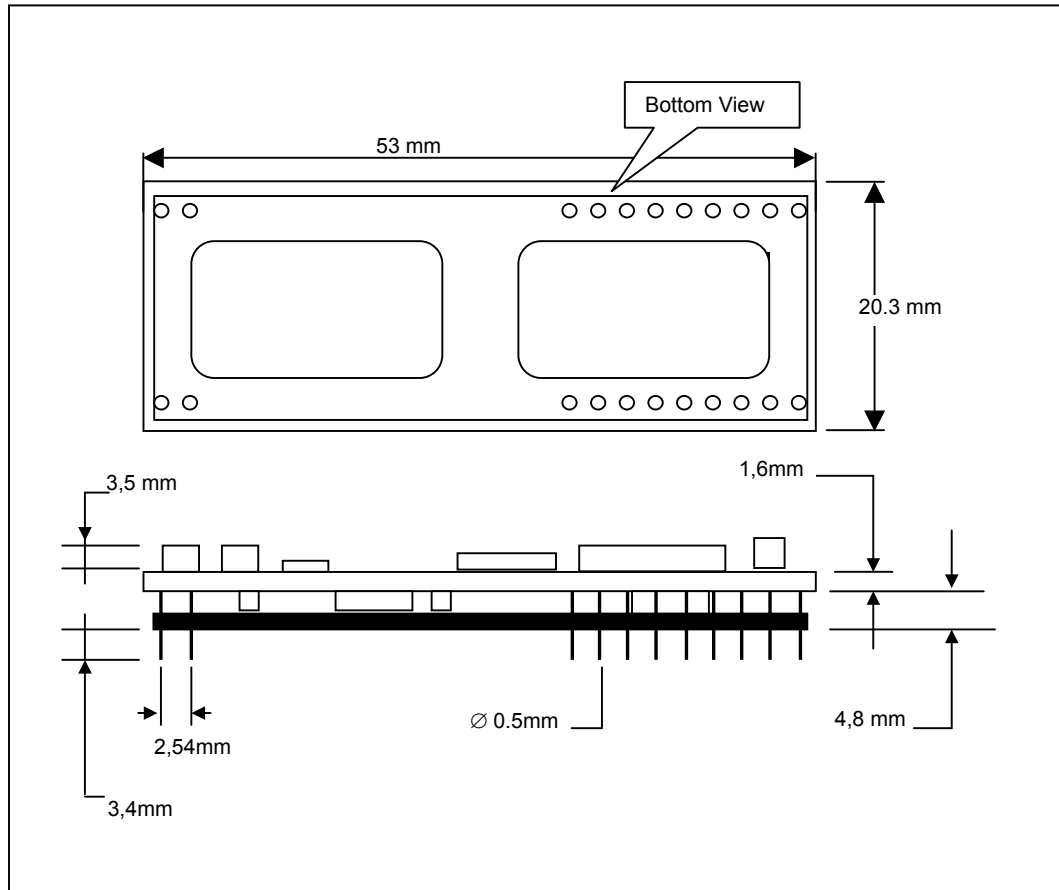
AL2094S Socket Modem Physical Dimensions
